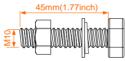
Dimensions of fastener for metal frame (figures in mm)
